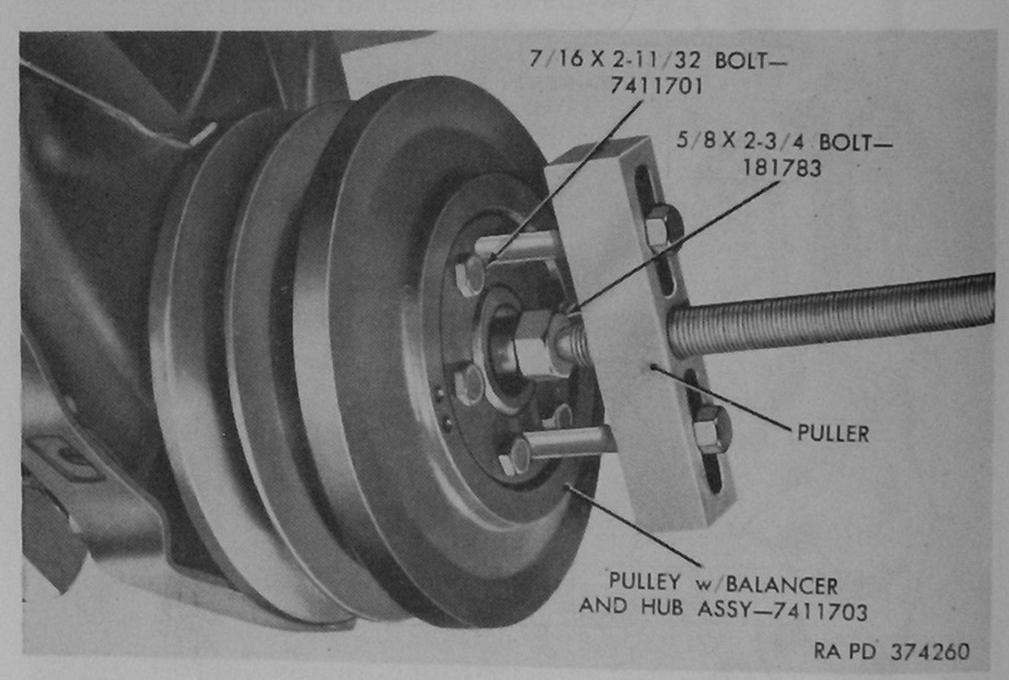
Removing crankshaft pulley and balancer assembly from crankshaft using puller 7950886 (engine assembly 7411599 shown).
